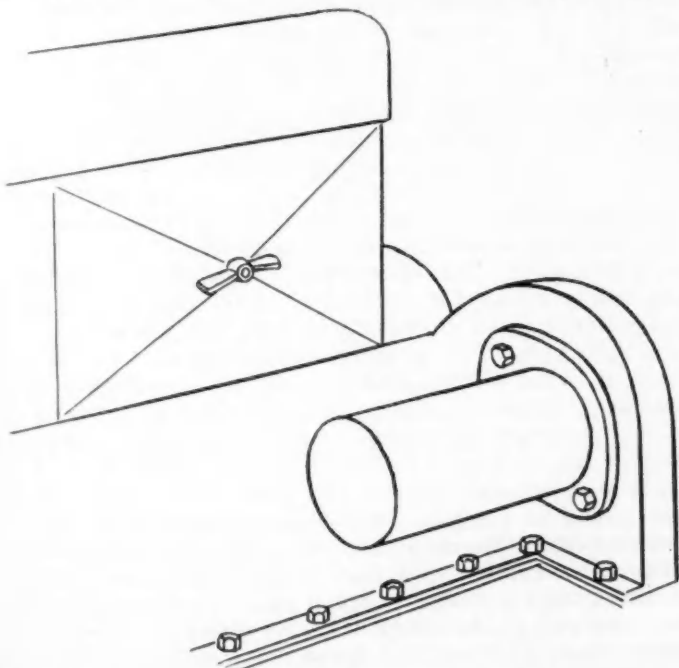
AN ACCESSIBLE ATTACHMENT OF THE GENERATOR TO THE BACK OF THE TIMING GEAR CASE WHERE THE ENGINE USES A GEAR TRAIN IN THE FRONT END
